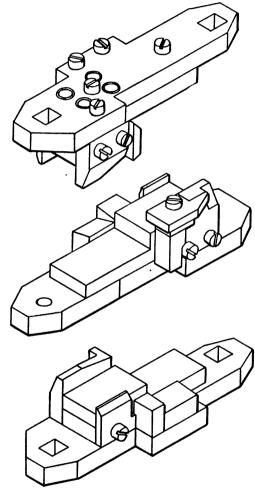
Pivotal-machine mould halves*. Scale: half size. Top half; bottom half; top half inverted.
